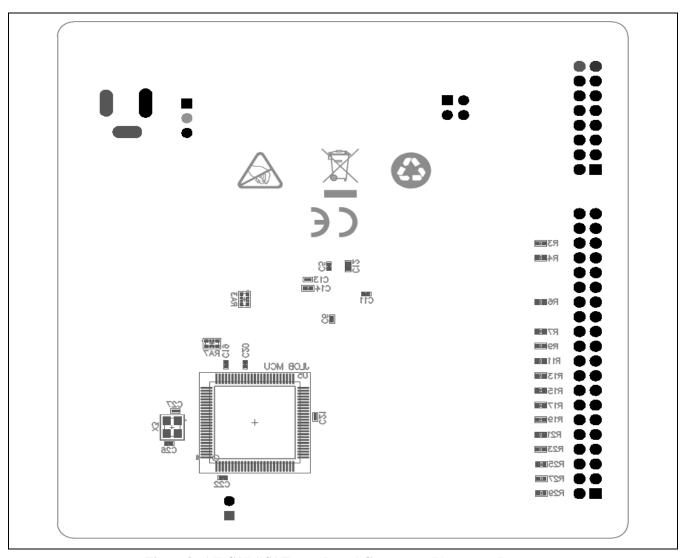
AE-CAP1-S1 Target Board Component Placement, Bottom
